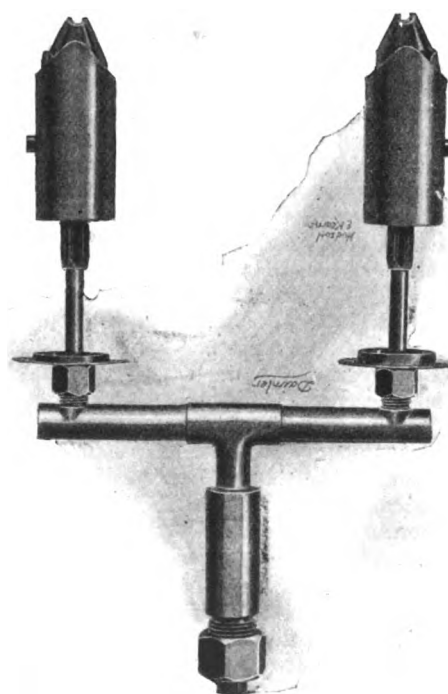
VIEW OF BURNERS—GRAVITY-FEED MOTOR.
